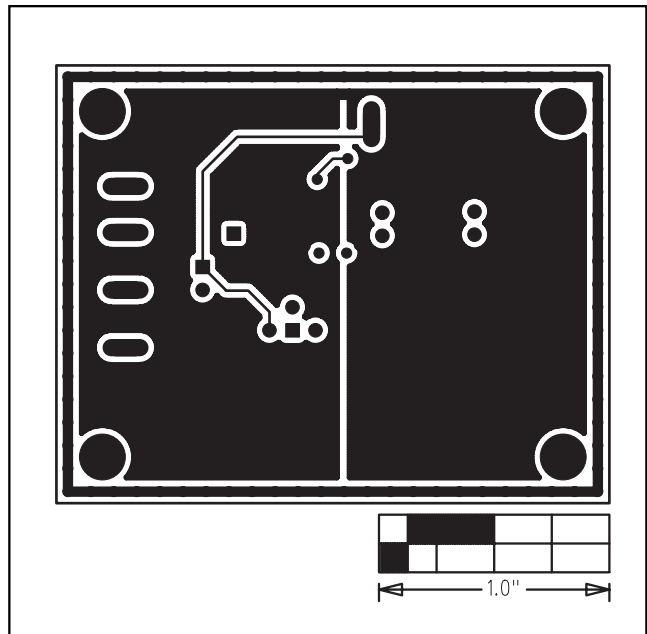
MAX9705B EV Kit PC Board Layout—GND Layer 3
